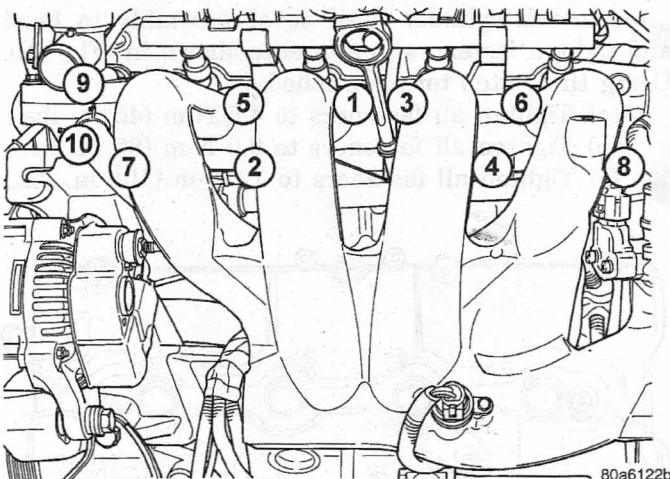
Intake Manifold Tightening Sequence-2.4L Engine
